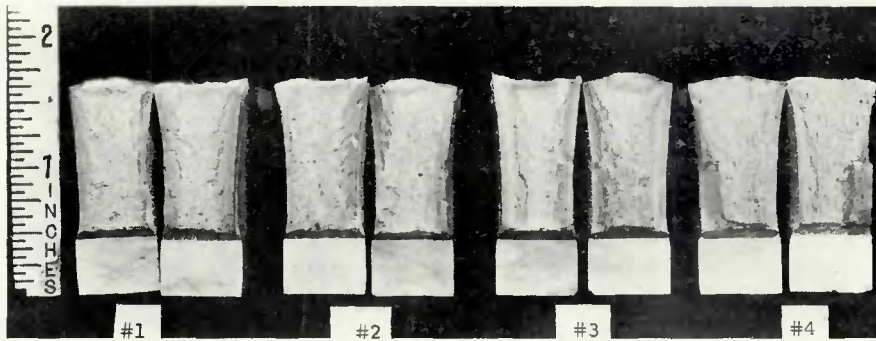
Fracture surfaces of dynamic test tear specimens from an aluminum electron beam weld
